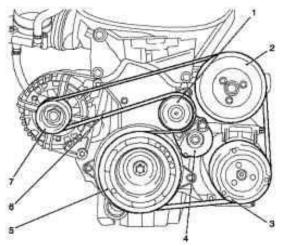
Poly-V belt petrol engine Z 18 XER DOHC-I: 1 - tensioning and guide roller Poly-V belt, 2 - drive pulley coolant pump, 3 - drive pulley of the compressor air conditioning systems; 4 - Poly-V belt tensioner, 5 - snubber crankshaft 6 - Poly-V belt; 7 - drive pulley of the alternator
